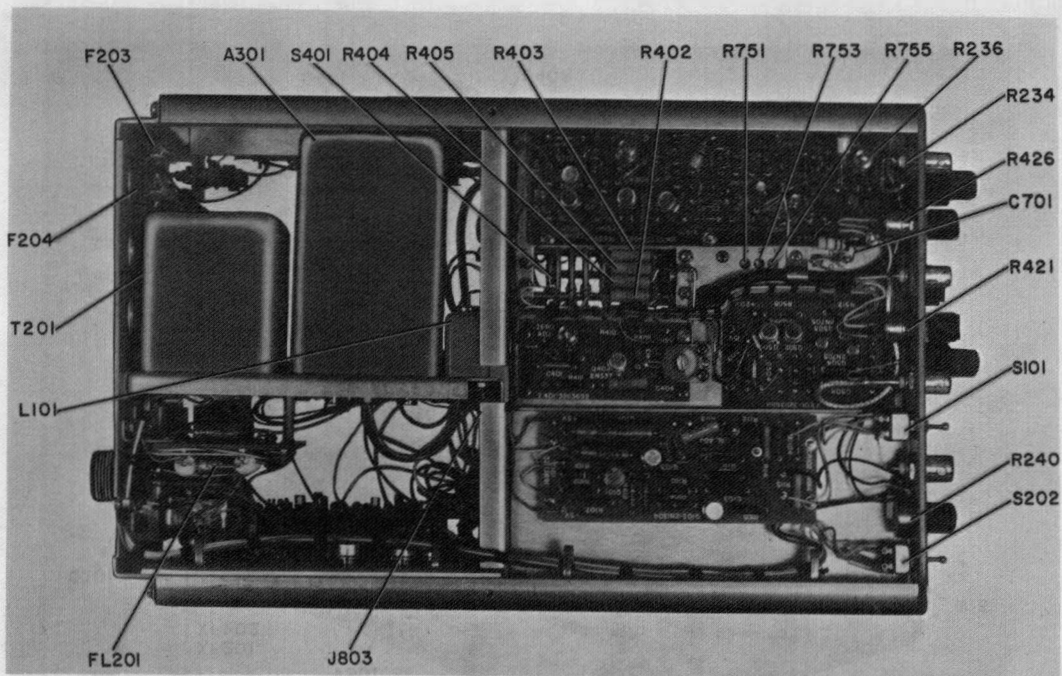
Oscilloscope AN/USM-117, only, Chassis Assembly, Bottom View
